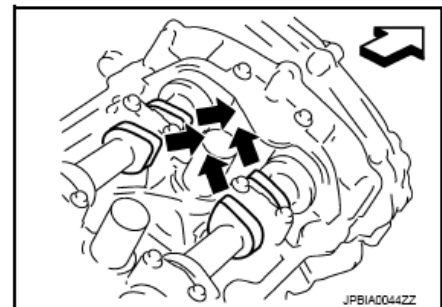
Identifying Intake And Exhaust Cam Nose Positions
